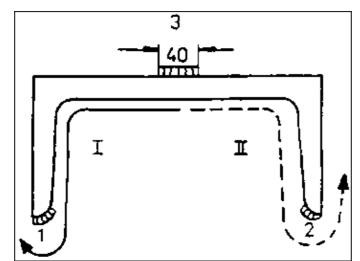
Channel profile tacked on the base plate; the figure indicates the welding sequence
